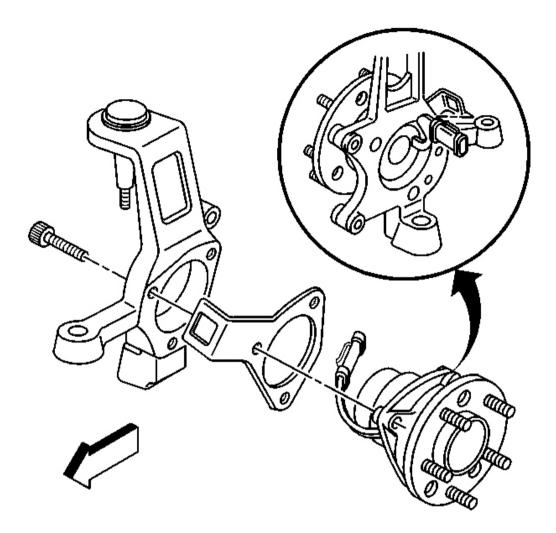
Wheel Hub & Mounting Bolts Courtesy of GENERAL MOTORS CORP.
